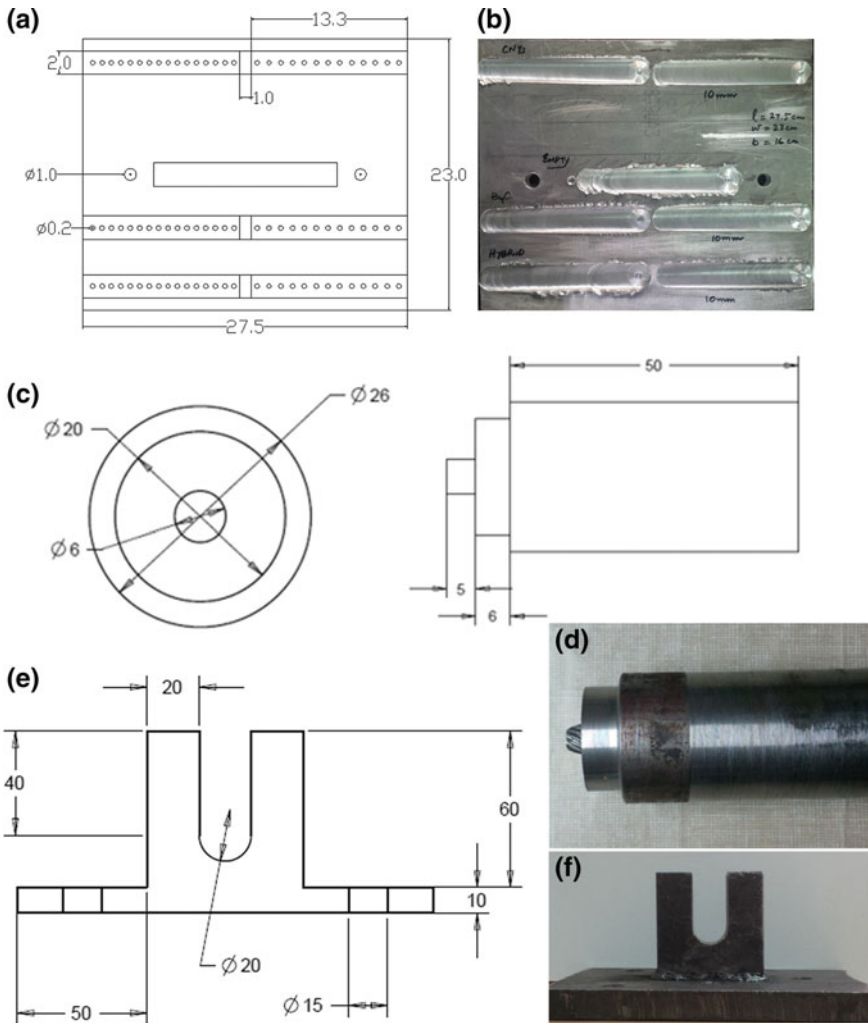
Drawings and images of a Al5083 plate dimension, b Al5083 plate after FSP, c drawing H-13 tool, d image of FSP tool after machining [15], e customize bend-ductility die, and f Die after fabrication
